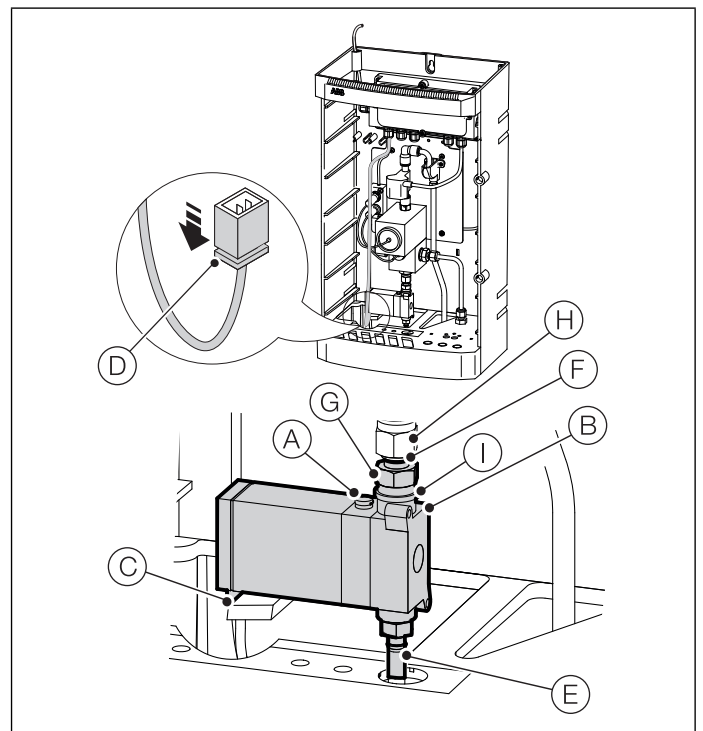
Replacing the drain valve assembly and drain valve cable
